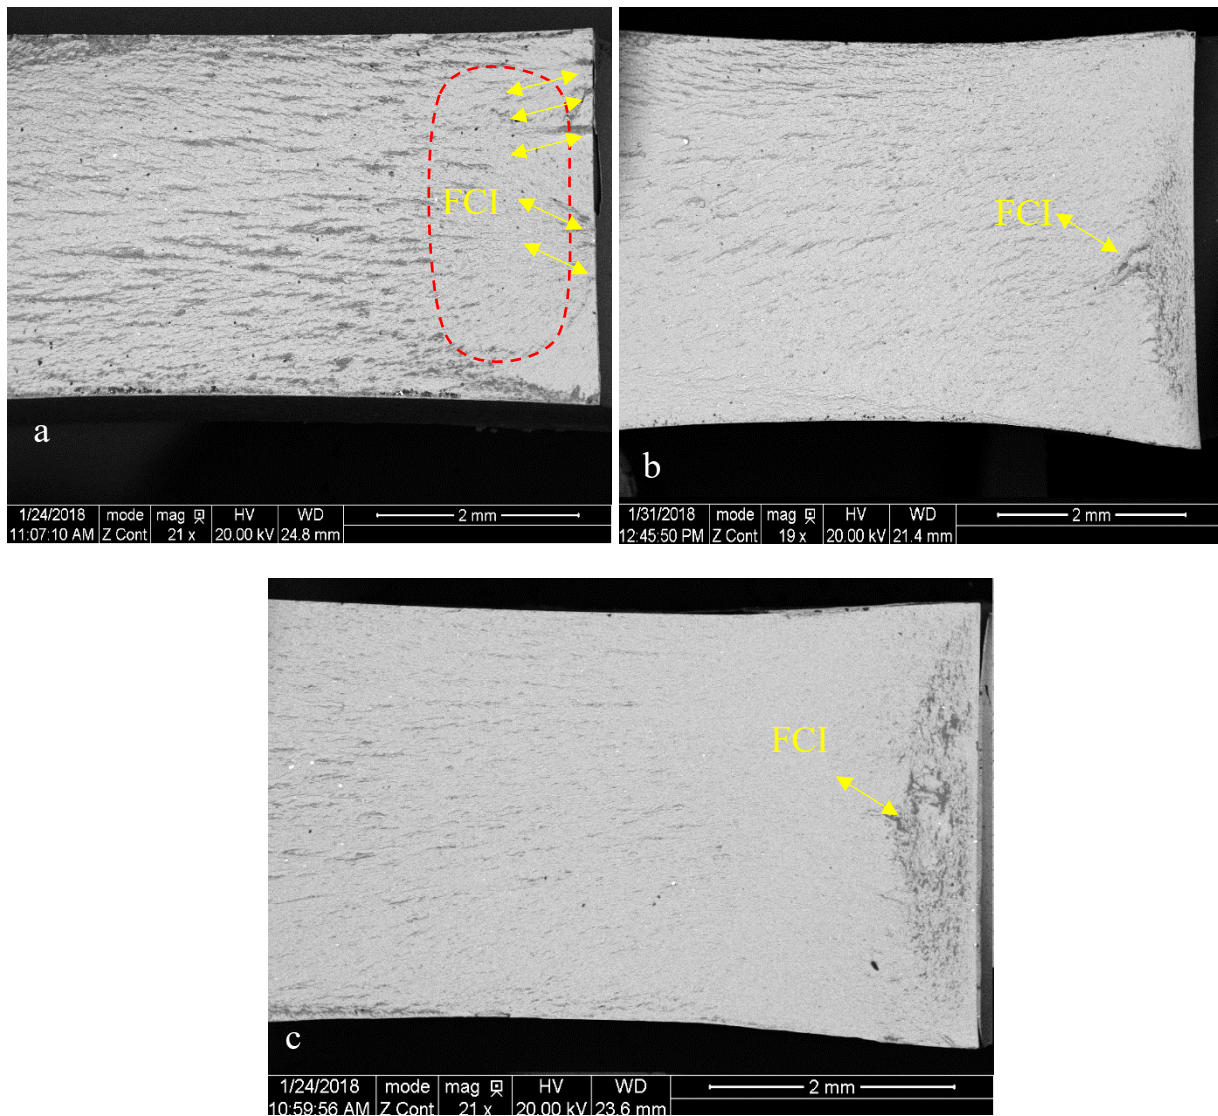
Fracture surface of 170 MPa fatigue tested sample, a) UCE, b) SCE, c) DCE
